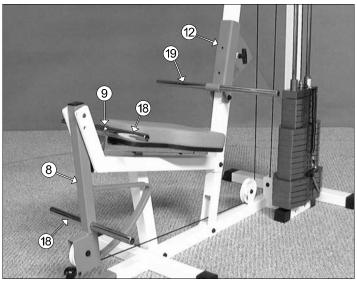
Next, insert one Foot Roll Tube 1 X 16 (#18) into the receptacle located on the Bench Press Adj. Seat Frame (#9). Then, insert the other Foot Roll Tube 1 X 16 (#18) into the receptacle located on the Leg Extension Arm (#8). Next, insert the Foot Roll Tube 1 X 23-3/4 (#19) into the receptacle located on the Adjustable Back Pad Bracket (#12), as shown above. Be sure all these tubes are centered at the receptacles from end-to-end.
